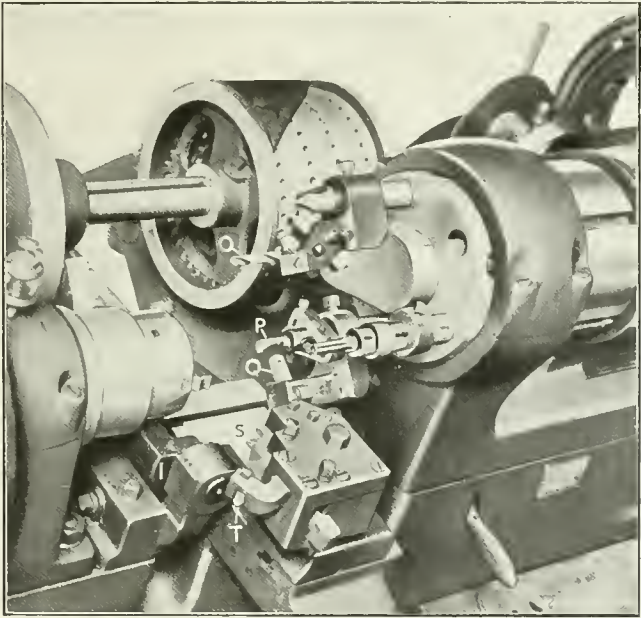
Another View of Tool Equipment for Machining Handwheel
